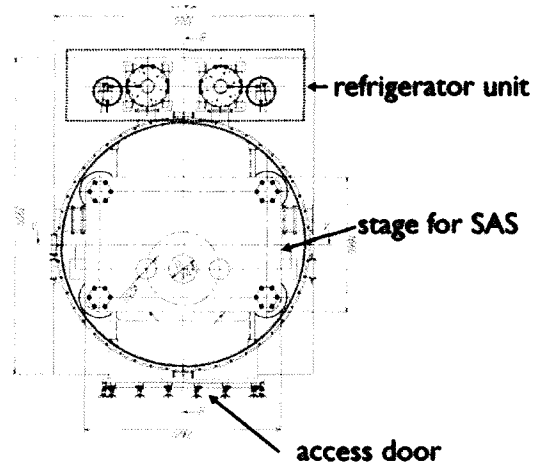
Top view of the cryostat. Two sets of refrigerator units are shown. We can access the inner shield from a side access door.
